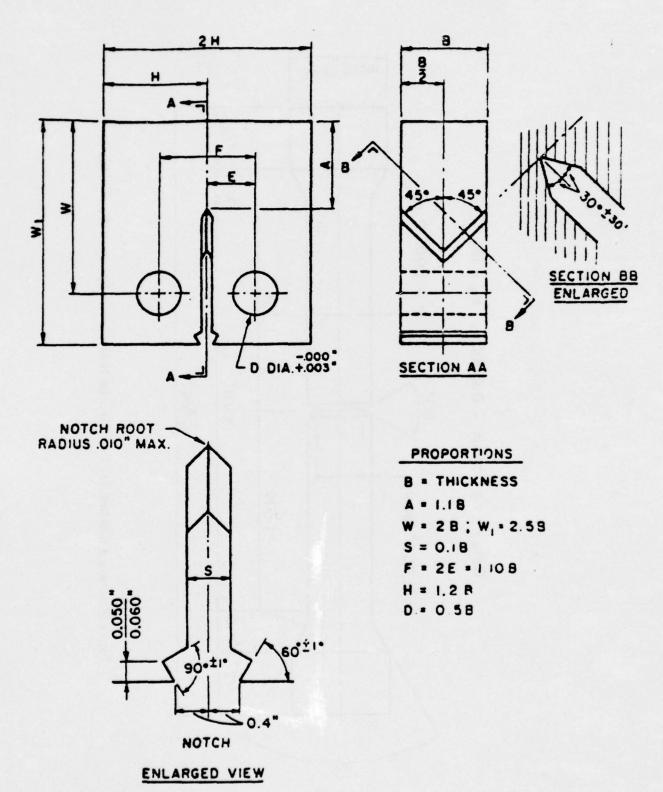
Compact-Tension Fracture-Toughness Specimen.
